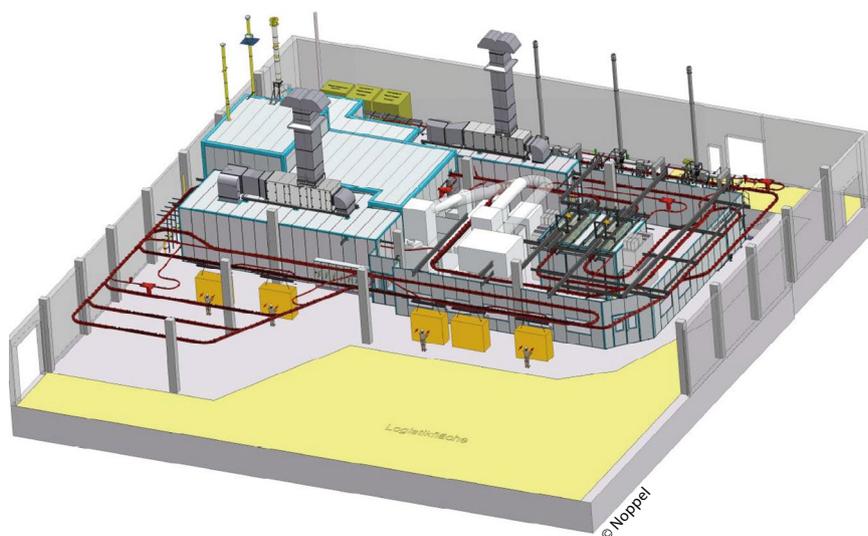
> Compact plant layout with spacious loading and unloading areas.
